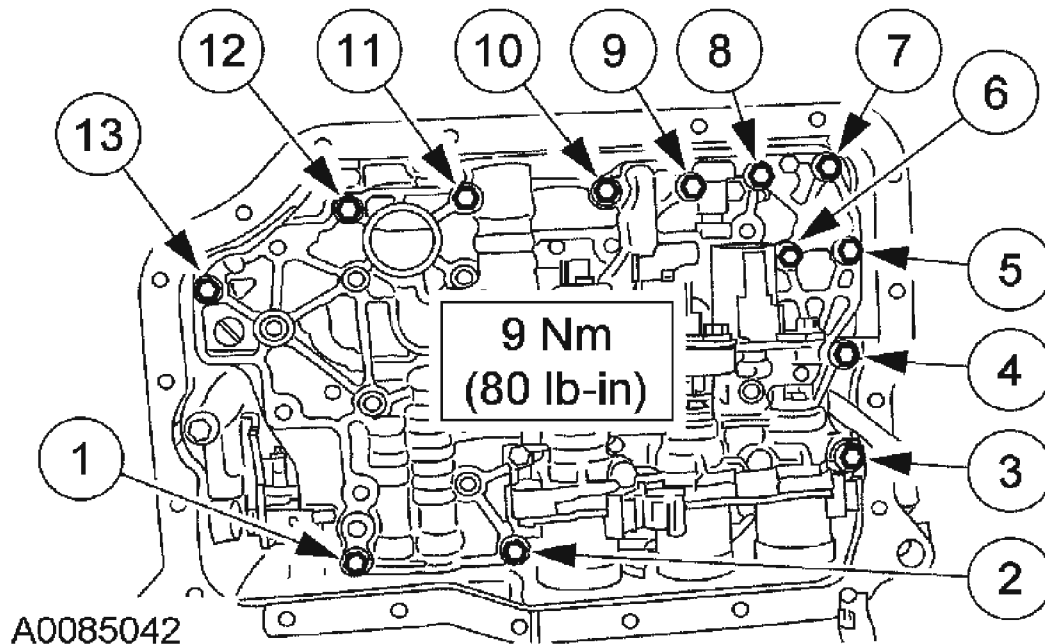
Identifying Main Control Valve Body Retaining Bolts Tightening Sequence
